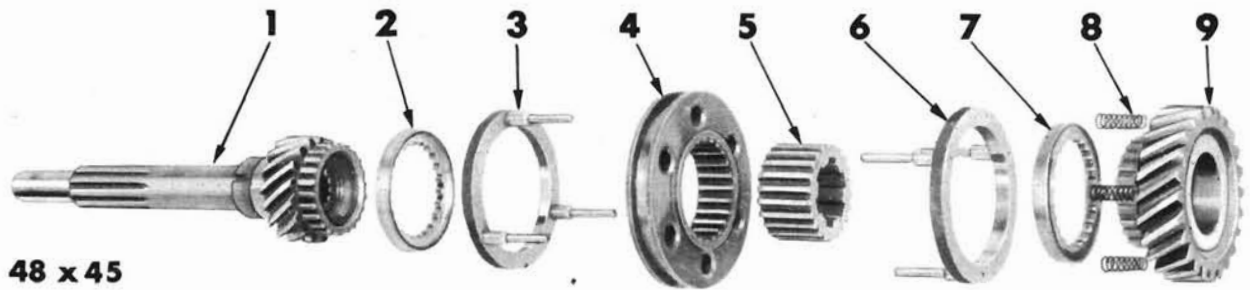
Transmission Synchronizer and Second Speed Gear Assembly
